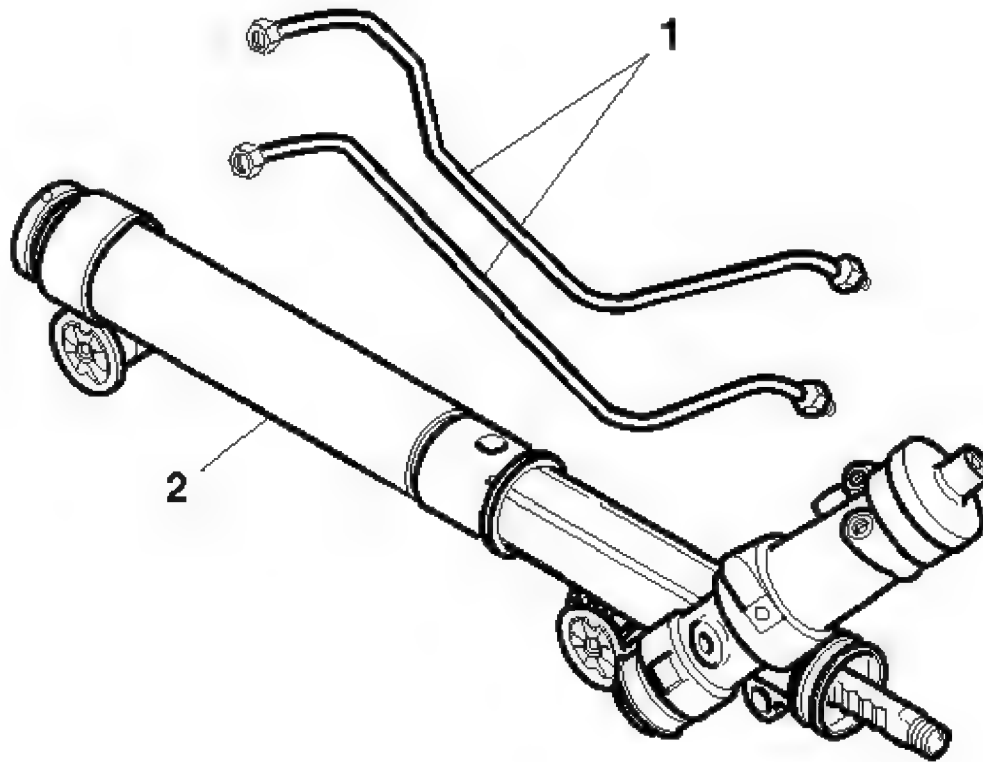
Cylinder Line Assemblies & Rack & Pinion Gear Assembly
